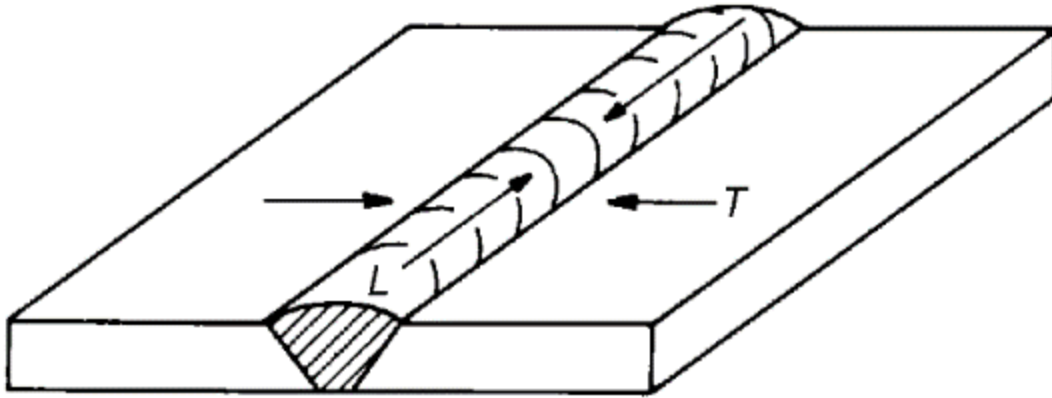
Longitudinal (L) and transverse (T) shrinkage stress in butt joint weld [84]
